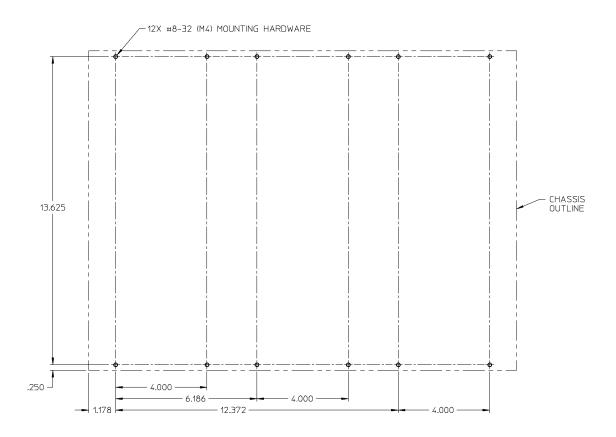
Mounting Template of MicroNet 12 Slot I/O Chassis
